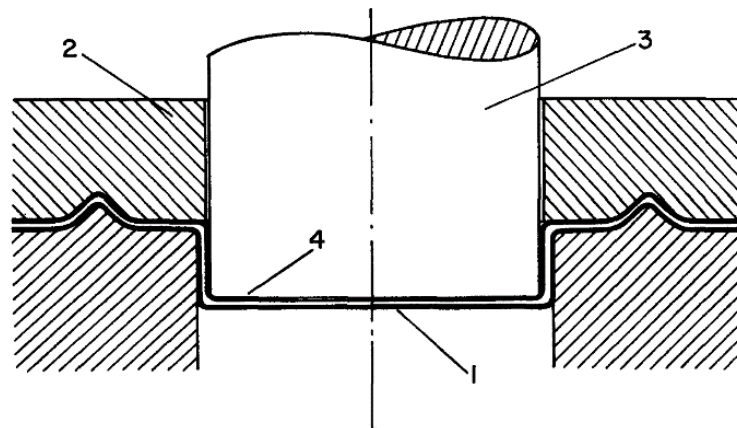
A schematic diagram of the Marciniak test: 1. testing specimen, 2. annular blank holder, 3. punch and 4. sheet metal ring [42].
